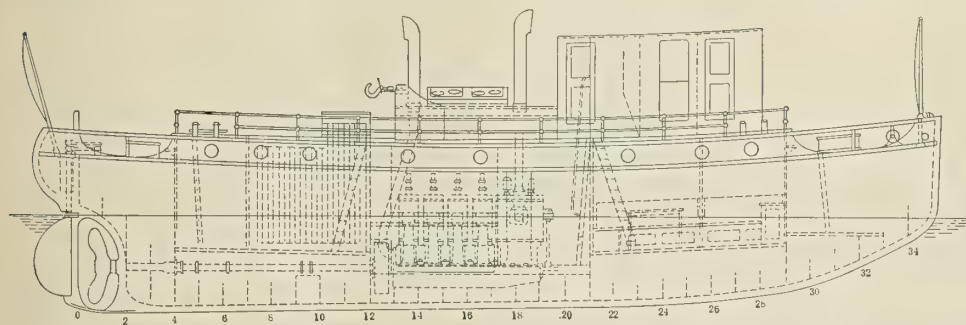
Tug and Icebreaker Fitted with 120-Horsepower Polar Diesel Engine
